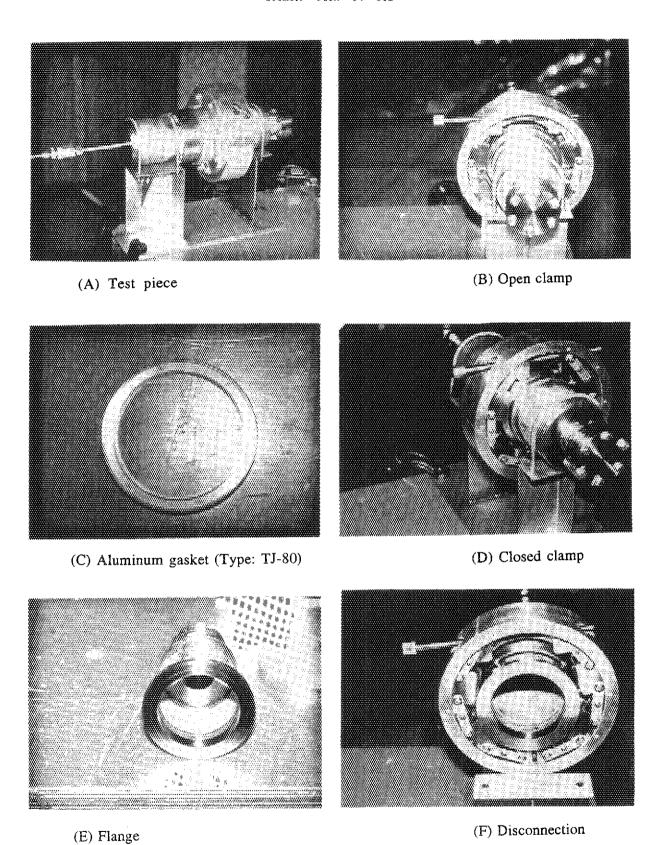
External view of prototype clamping chain type connector for a 80-A pipe
